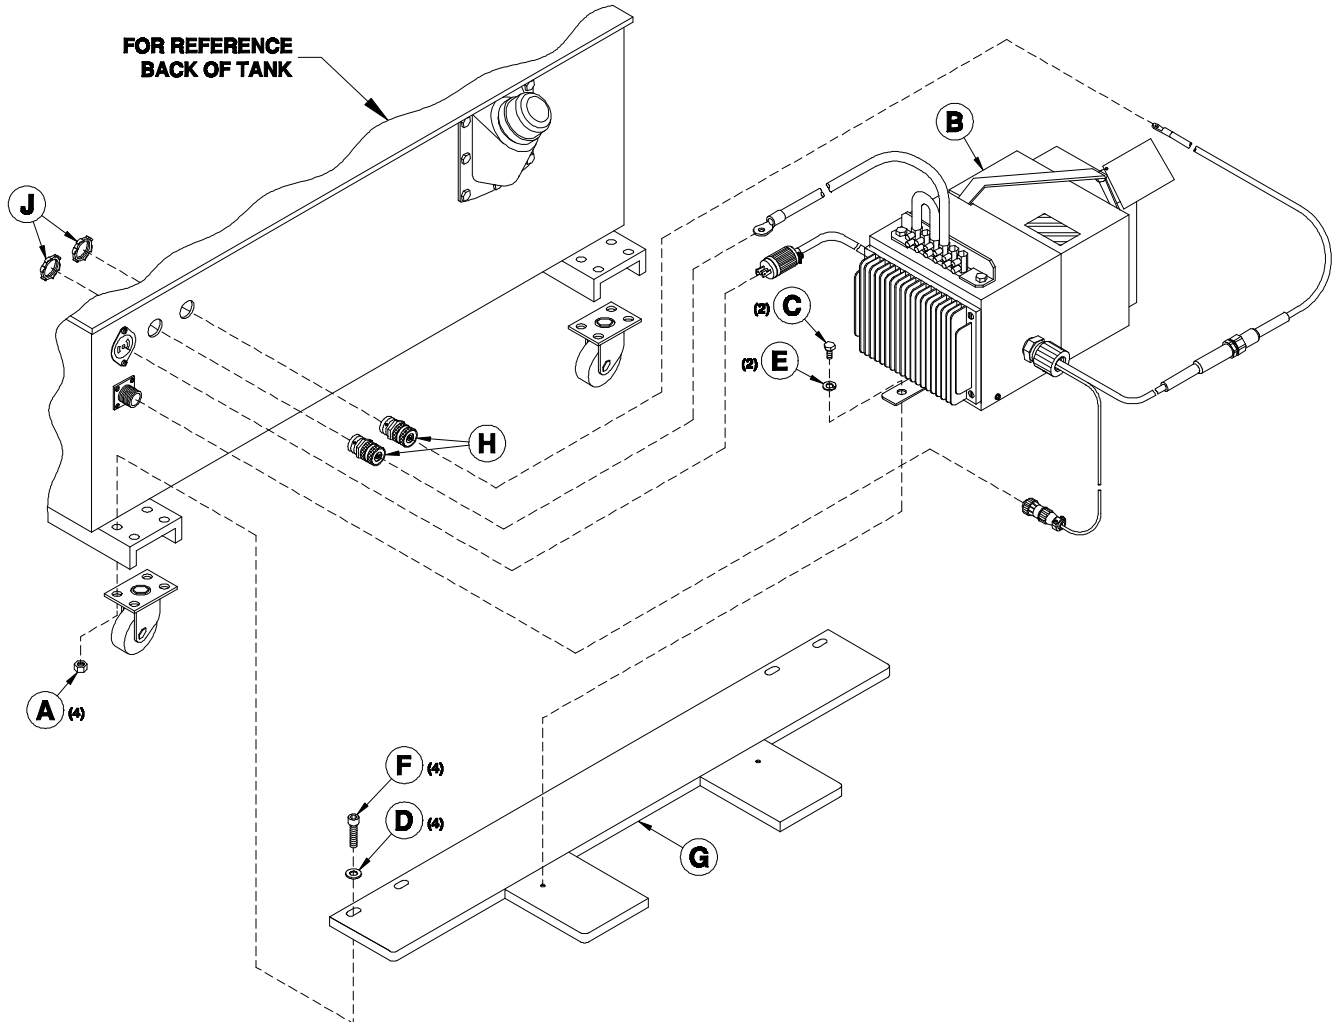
H-2000 (IHTC) Assembly (Part No15000-Size-IHTC) Exploded View Sheet 1 of 5
